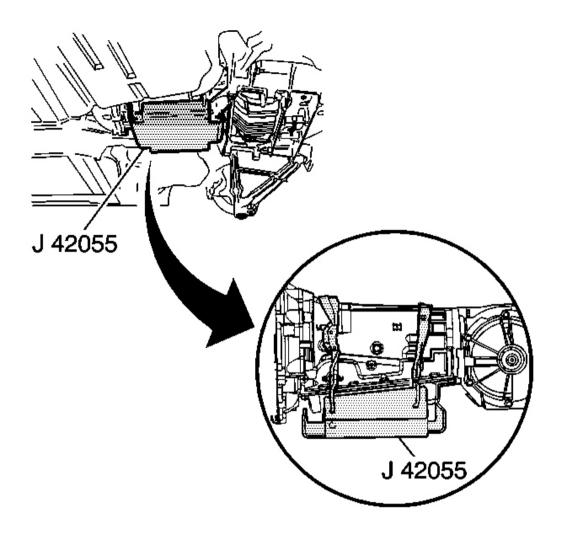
J 42055 & Transmission Jack Courtesy of GENERAL MOTORS CORP.
